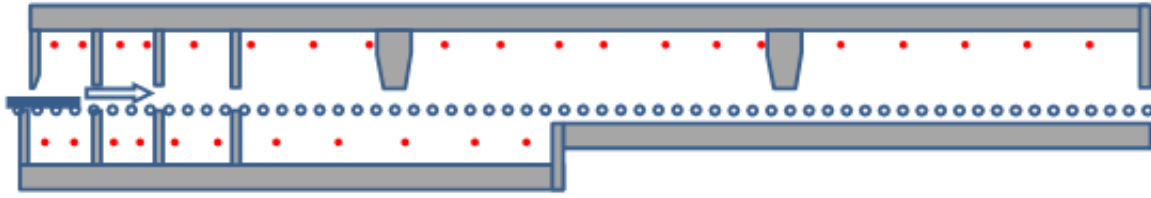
Schematic drawing of a roller hearth furnace, highlighting radiant tubes, baffles and rollers.
